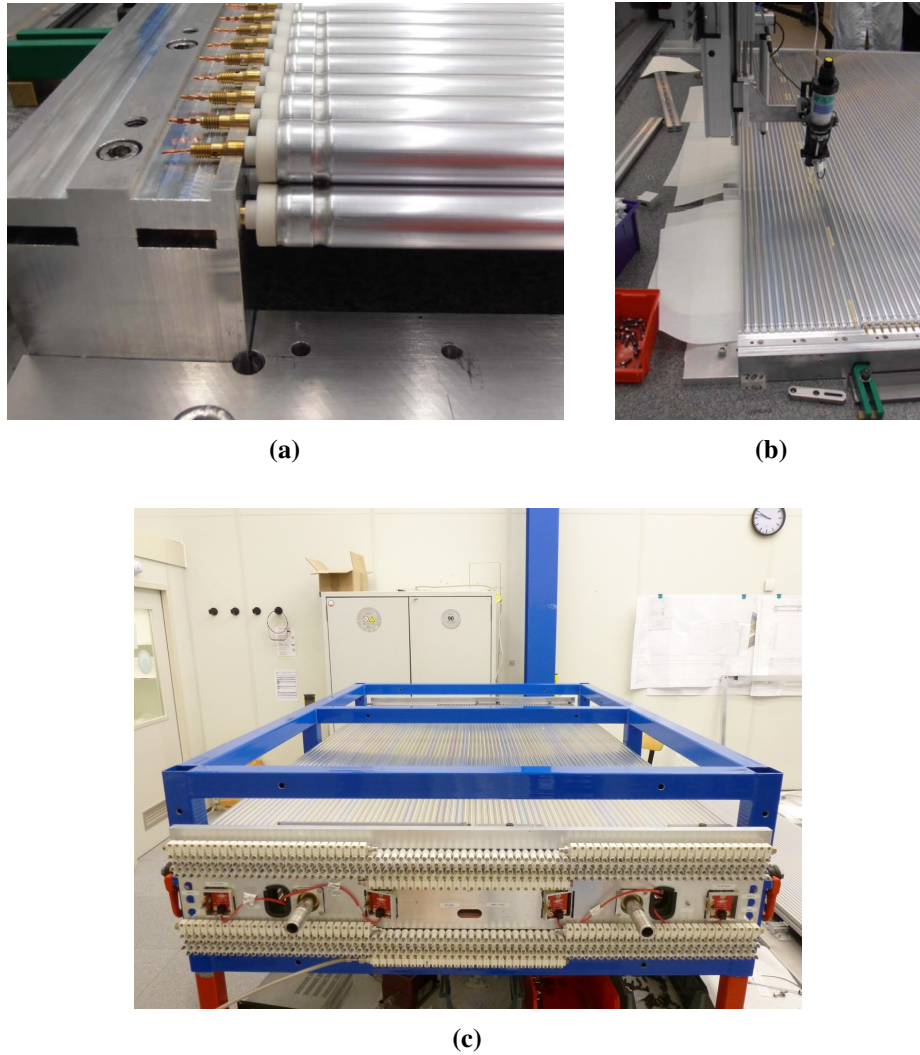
Photographs of the different stages of the sMDT chamber assembly: (a) the first two drift tube layers of a multilayer in the assembly jigging, (b) application of glue with an automated glue dispenser, (c) assembled chamber with two multilayers, the support frame carrying the optical in-plane alignment system and with the gas distribution system mounted.
